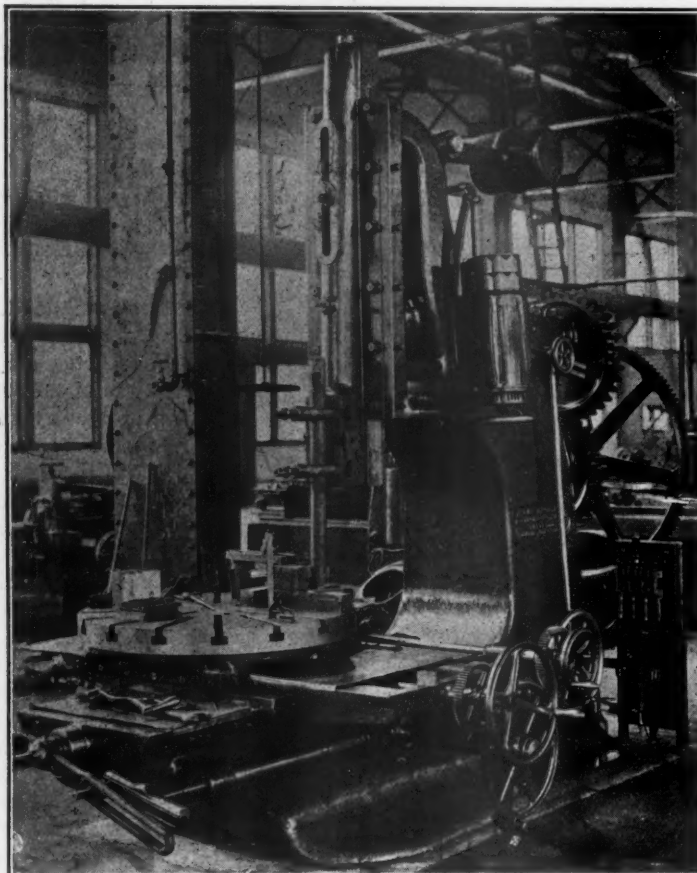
VIEW OF THE 19-IN. PUTNAM SLOTTER, SHOWING ARRANGEMENT OF CONTROLLER, TABLET BOARD, ETC.
